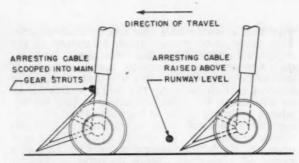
Scoop on front of wheel lifts cable to wheel strut. Cable must be elevated above ground clearance of scoop.
